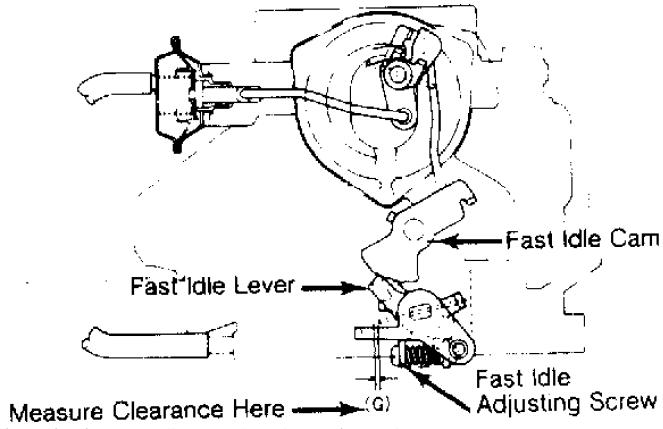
Adjusting Fast Idle Cam (Throttle Opening Angle) Courtesy of Mazda Motors Corp.
